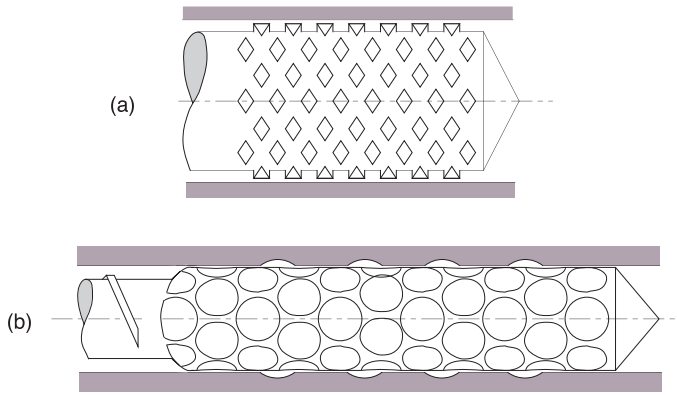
Pin barrel extruder (Quer Strom Misch Extruder)
